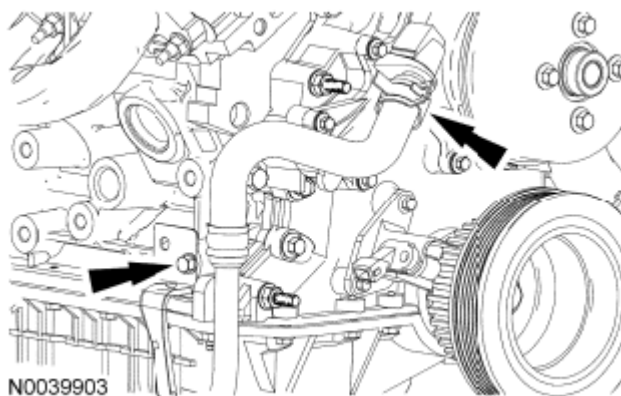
Locating Oil Cooler Hose Bracket Bolt
